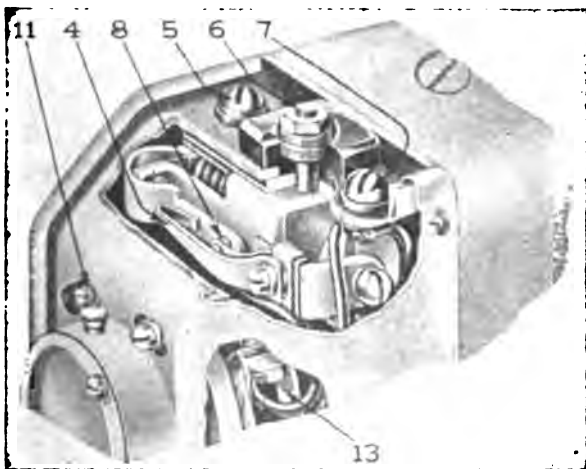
Part of housing on Gray & Davis third-brush generator cut away, showing method of mounting cutout
